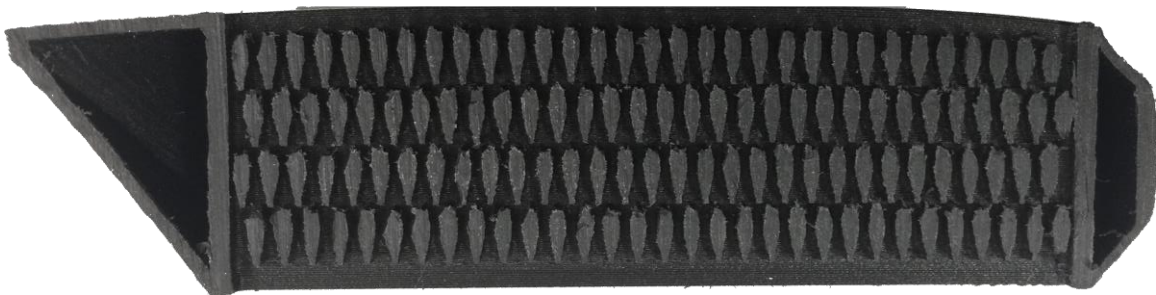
Printed portion of the airfoil-fin Onyx CF prototype.
